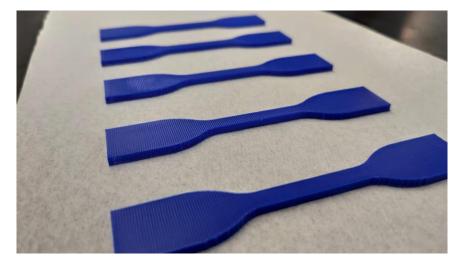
Transversal oriented dogbone specimen made from HatchBox filament.
